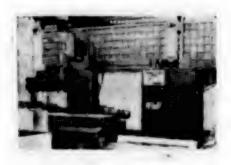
Machining of medium size housing parts on a machining center with a magazine for 48 tools. The machine tool is installed in a jig boring section, and does boring, drilling and milling operations with an accuracy of mutual location of holes within  $\frac{1}{2}$  0.03mm.
